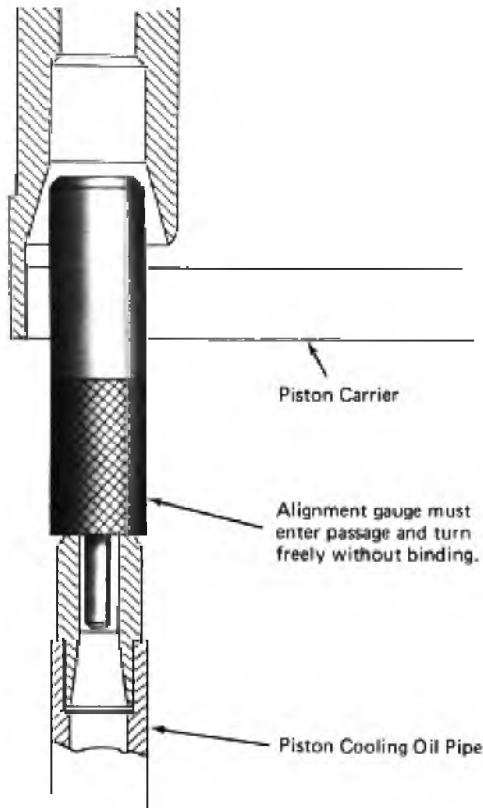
Piston Cooling Oil Pipe Alignment
